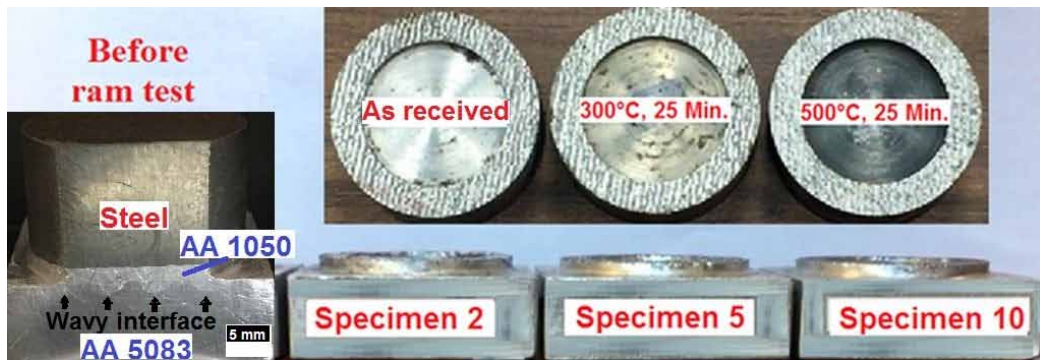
Interface side view before ram test and fracture surfaces of the specimens after ram tests
